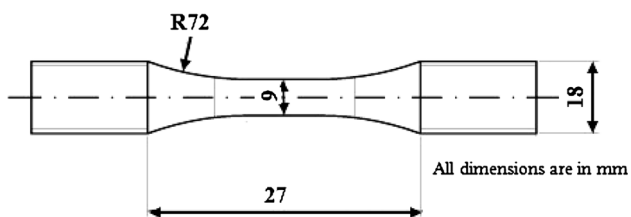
Dimension of fatigue strength test specimen (ASTM E466) [12]
